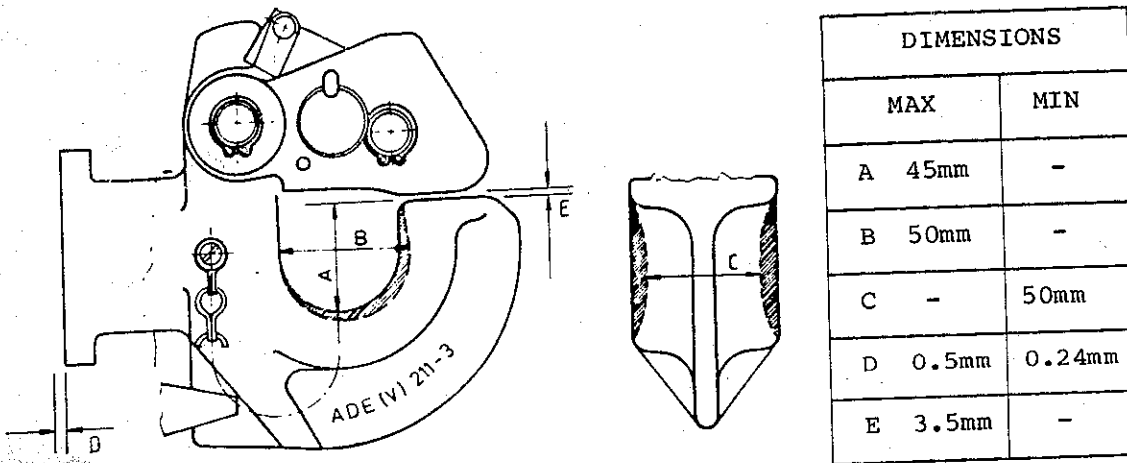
TOWING PINTLE ASSEMBLY - WEAR LIMITS
